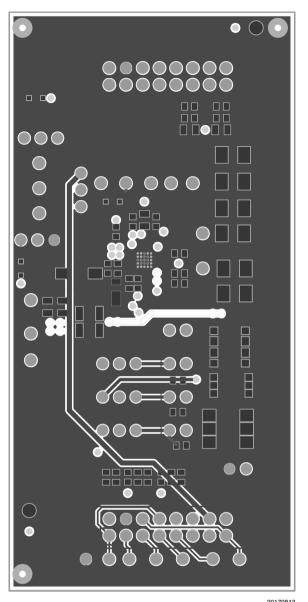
LP5526 Evaluation Board 4th Layer PCB Layout.
